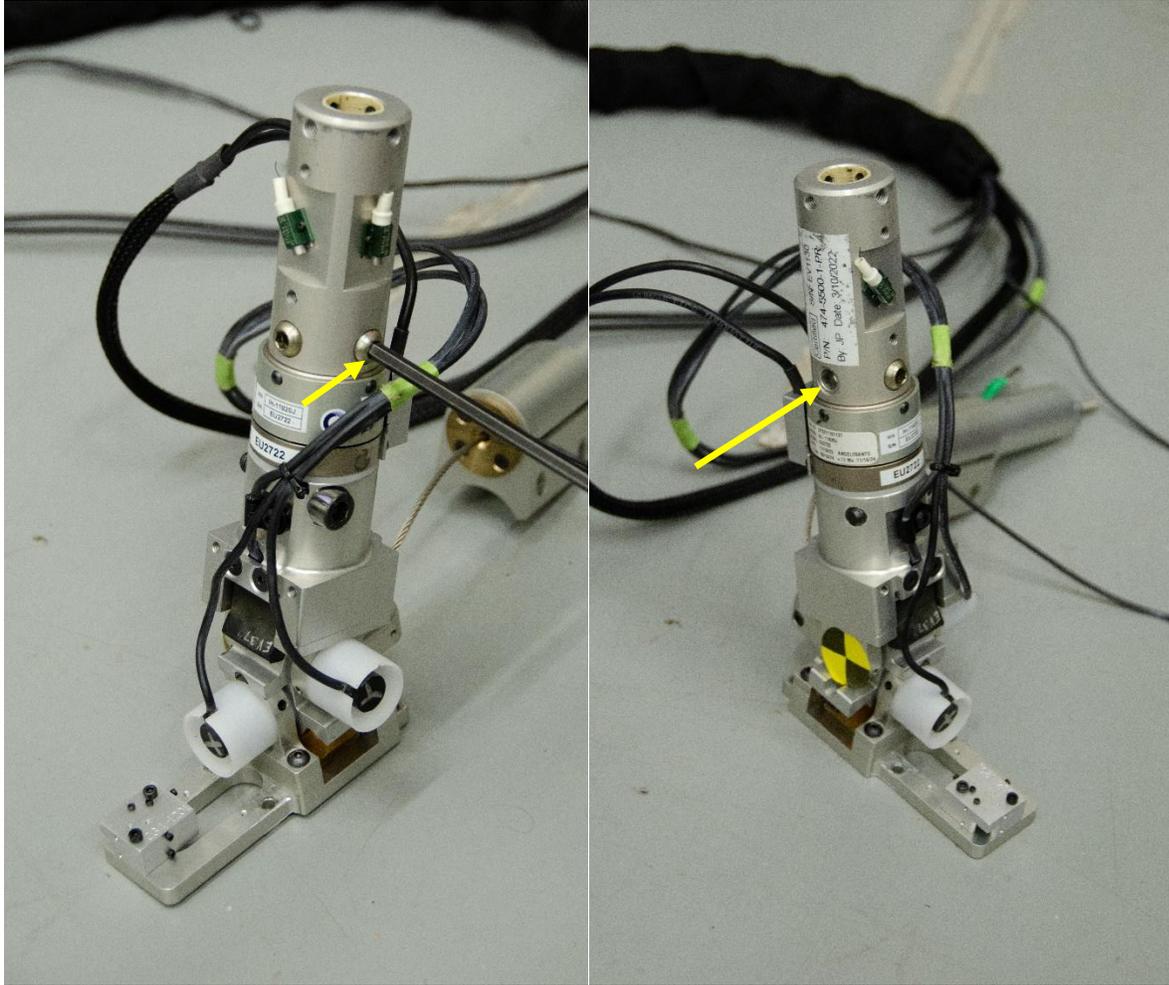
Remove bolts from left and right sides of lower tibia shaft
